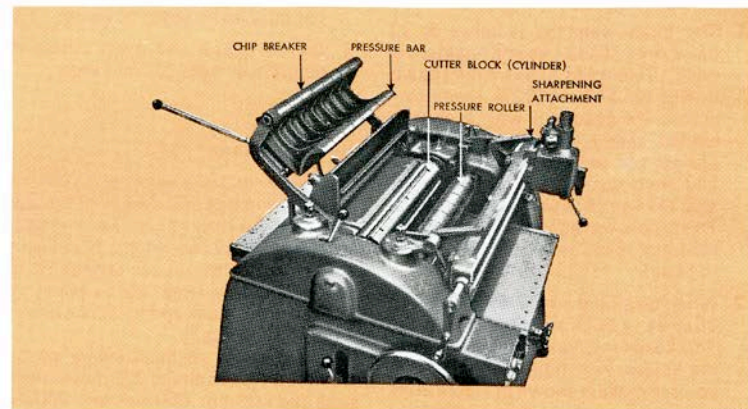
10 Chip Breaker Swung Up To Expose Cutter Block and Pressure Roller
